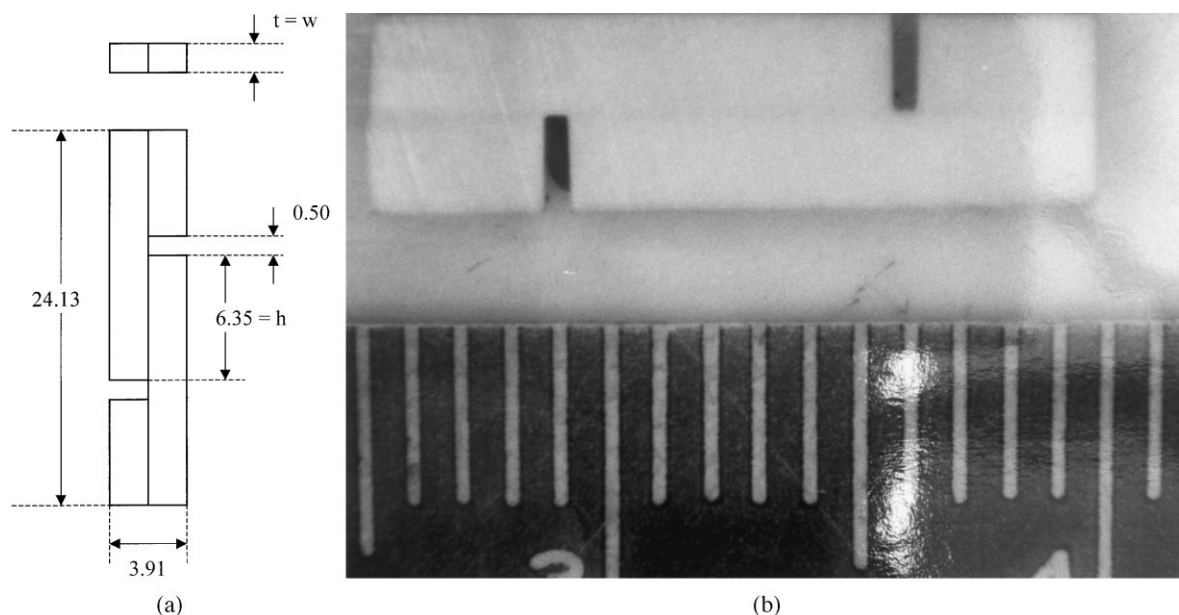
(a) Schematic of double-notch shear test specimen (dimensions in mm); (b) typical photograph of double-notch shear test specimen.
